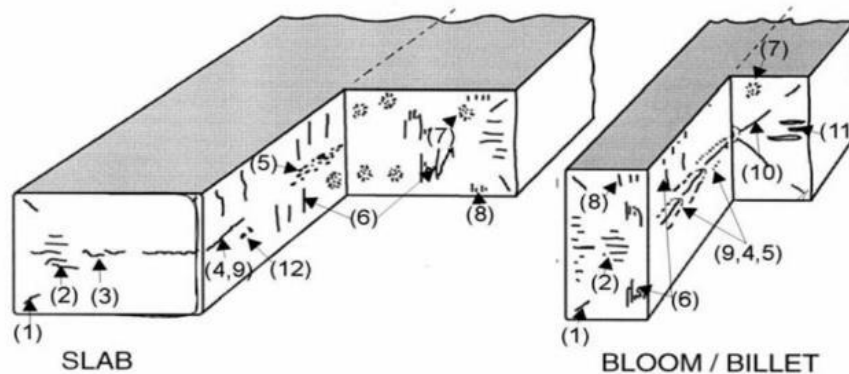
Internal defects [3,39] 1. Internal corner cracks; 2. Side halfway cracks; 3. Centreline cracks; 4. Centreline segregation; 5. Porosity; 6. Halfway cracks; 7. Non-metallic inclusions, clusters; 8. Sub-surface ghost lines; 9. Shrinkage cavity; 10. Star cracks, diagonal cracks; 11. Pinholes; 12. Semi macrosegregation
